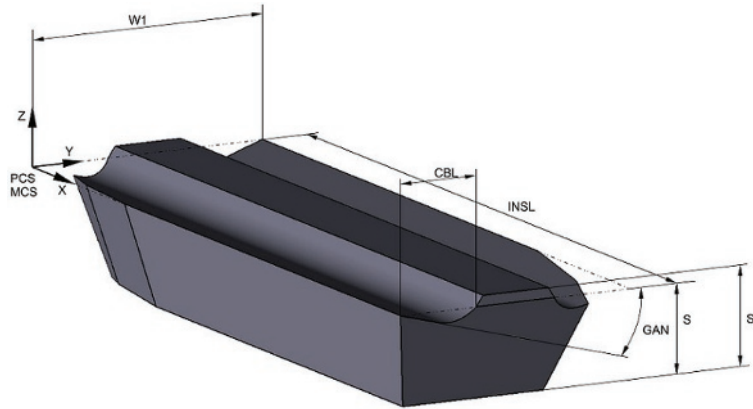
Chip breaker geometry of a reaming insert with two cutting edges and double plug chamfer
